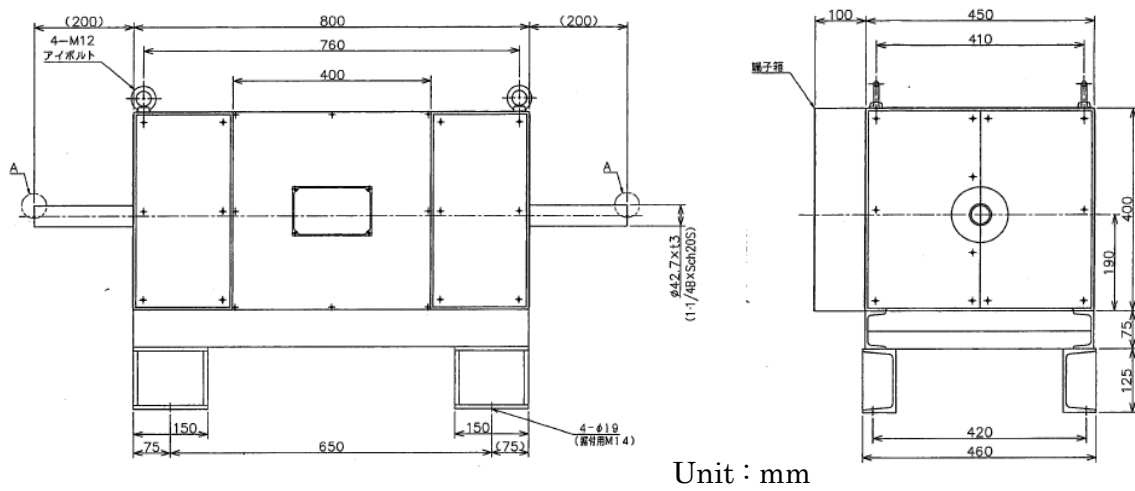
Drawing of level gauge in expansion tank of OLLOCHI.
